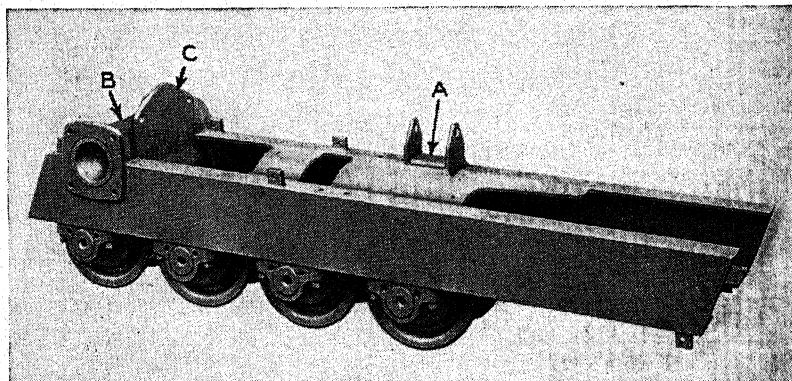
Track roller frame without idler, showing block "A" through which part of tractor weight is transferred to the frame; and bearing "B" through which balance of weight is transferred to frame.
